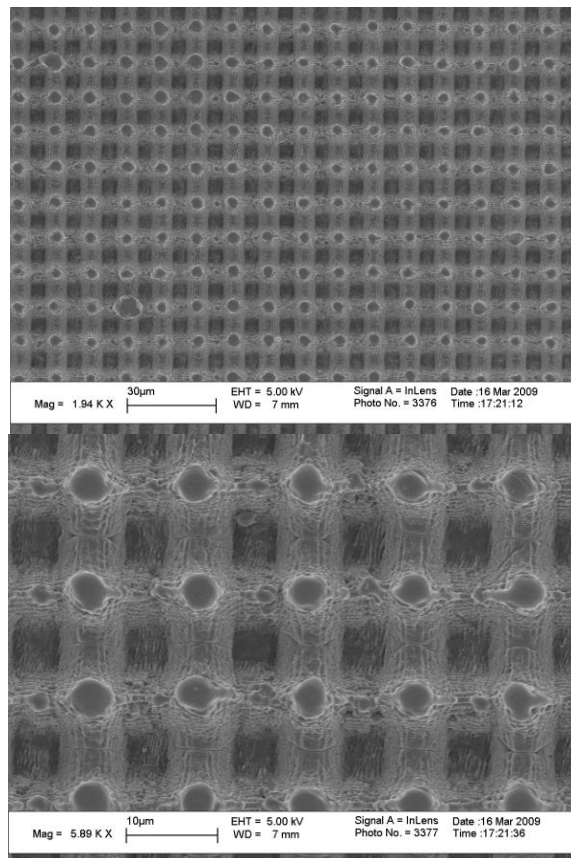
The injection moulded copy of the two-dimensional line structure written to the surface using cylindrical lens for light focusing.
